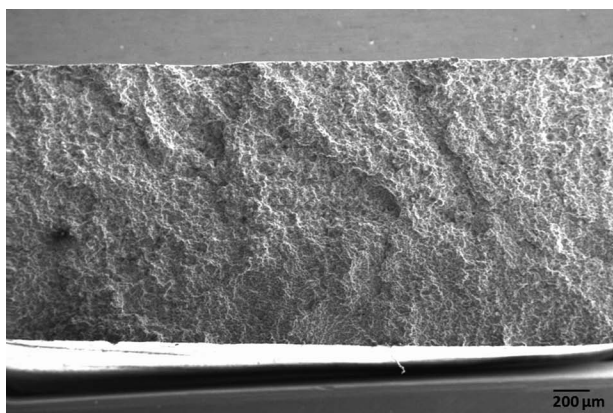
Fracture surface of a tensile-tested dissimilar weld joint of AA 2219-AA 5083 TIG welded. The specimen was tested at 77 K and failed at AA 2219 side weld interface
